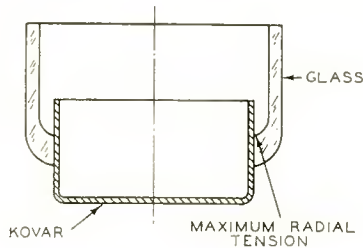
Glass-to-metal seal made to the outside surface of a copper-plated Kovar cylinder.
